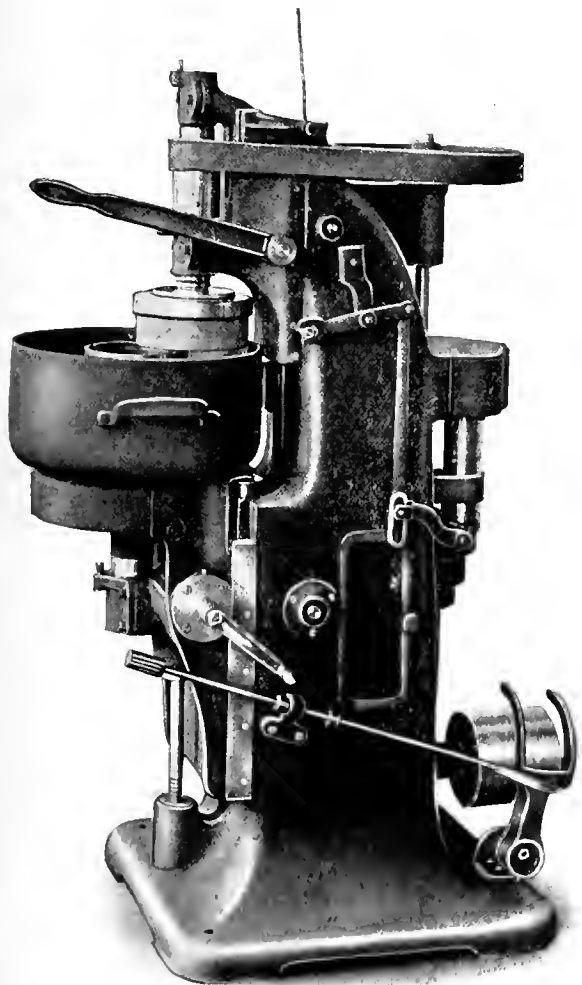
A Rotary Surface Grinder, provided with Magnetic Chuck
